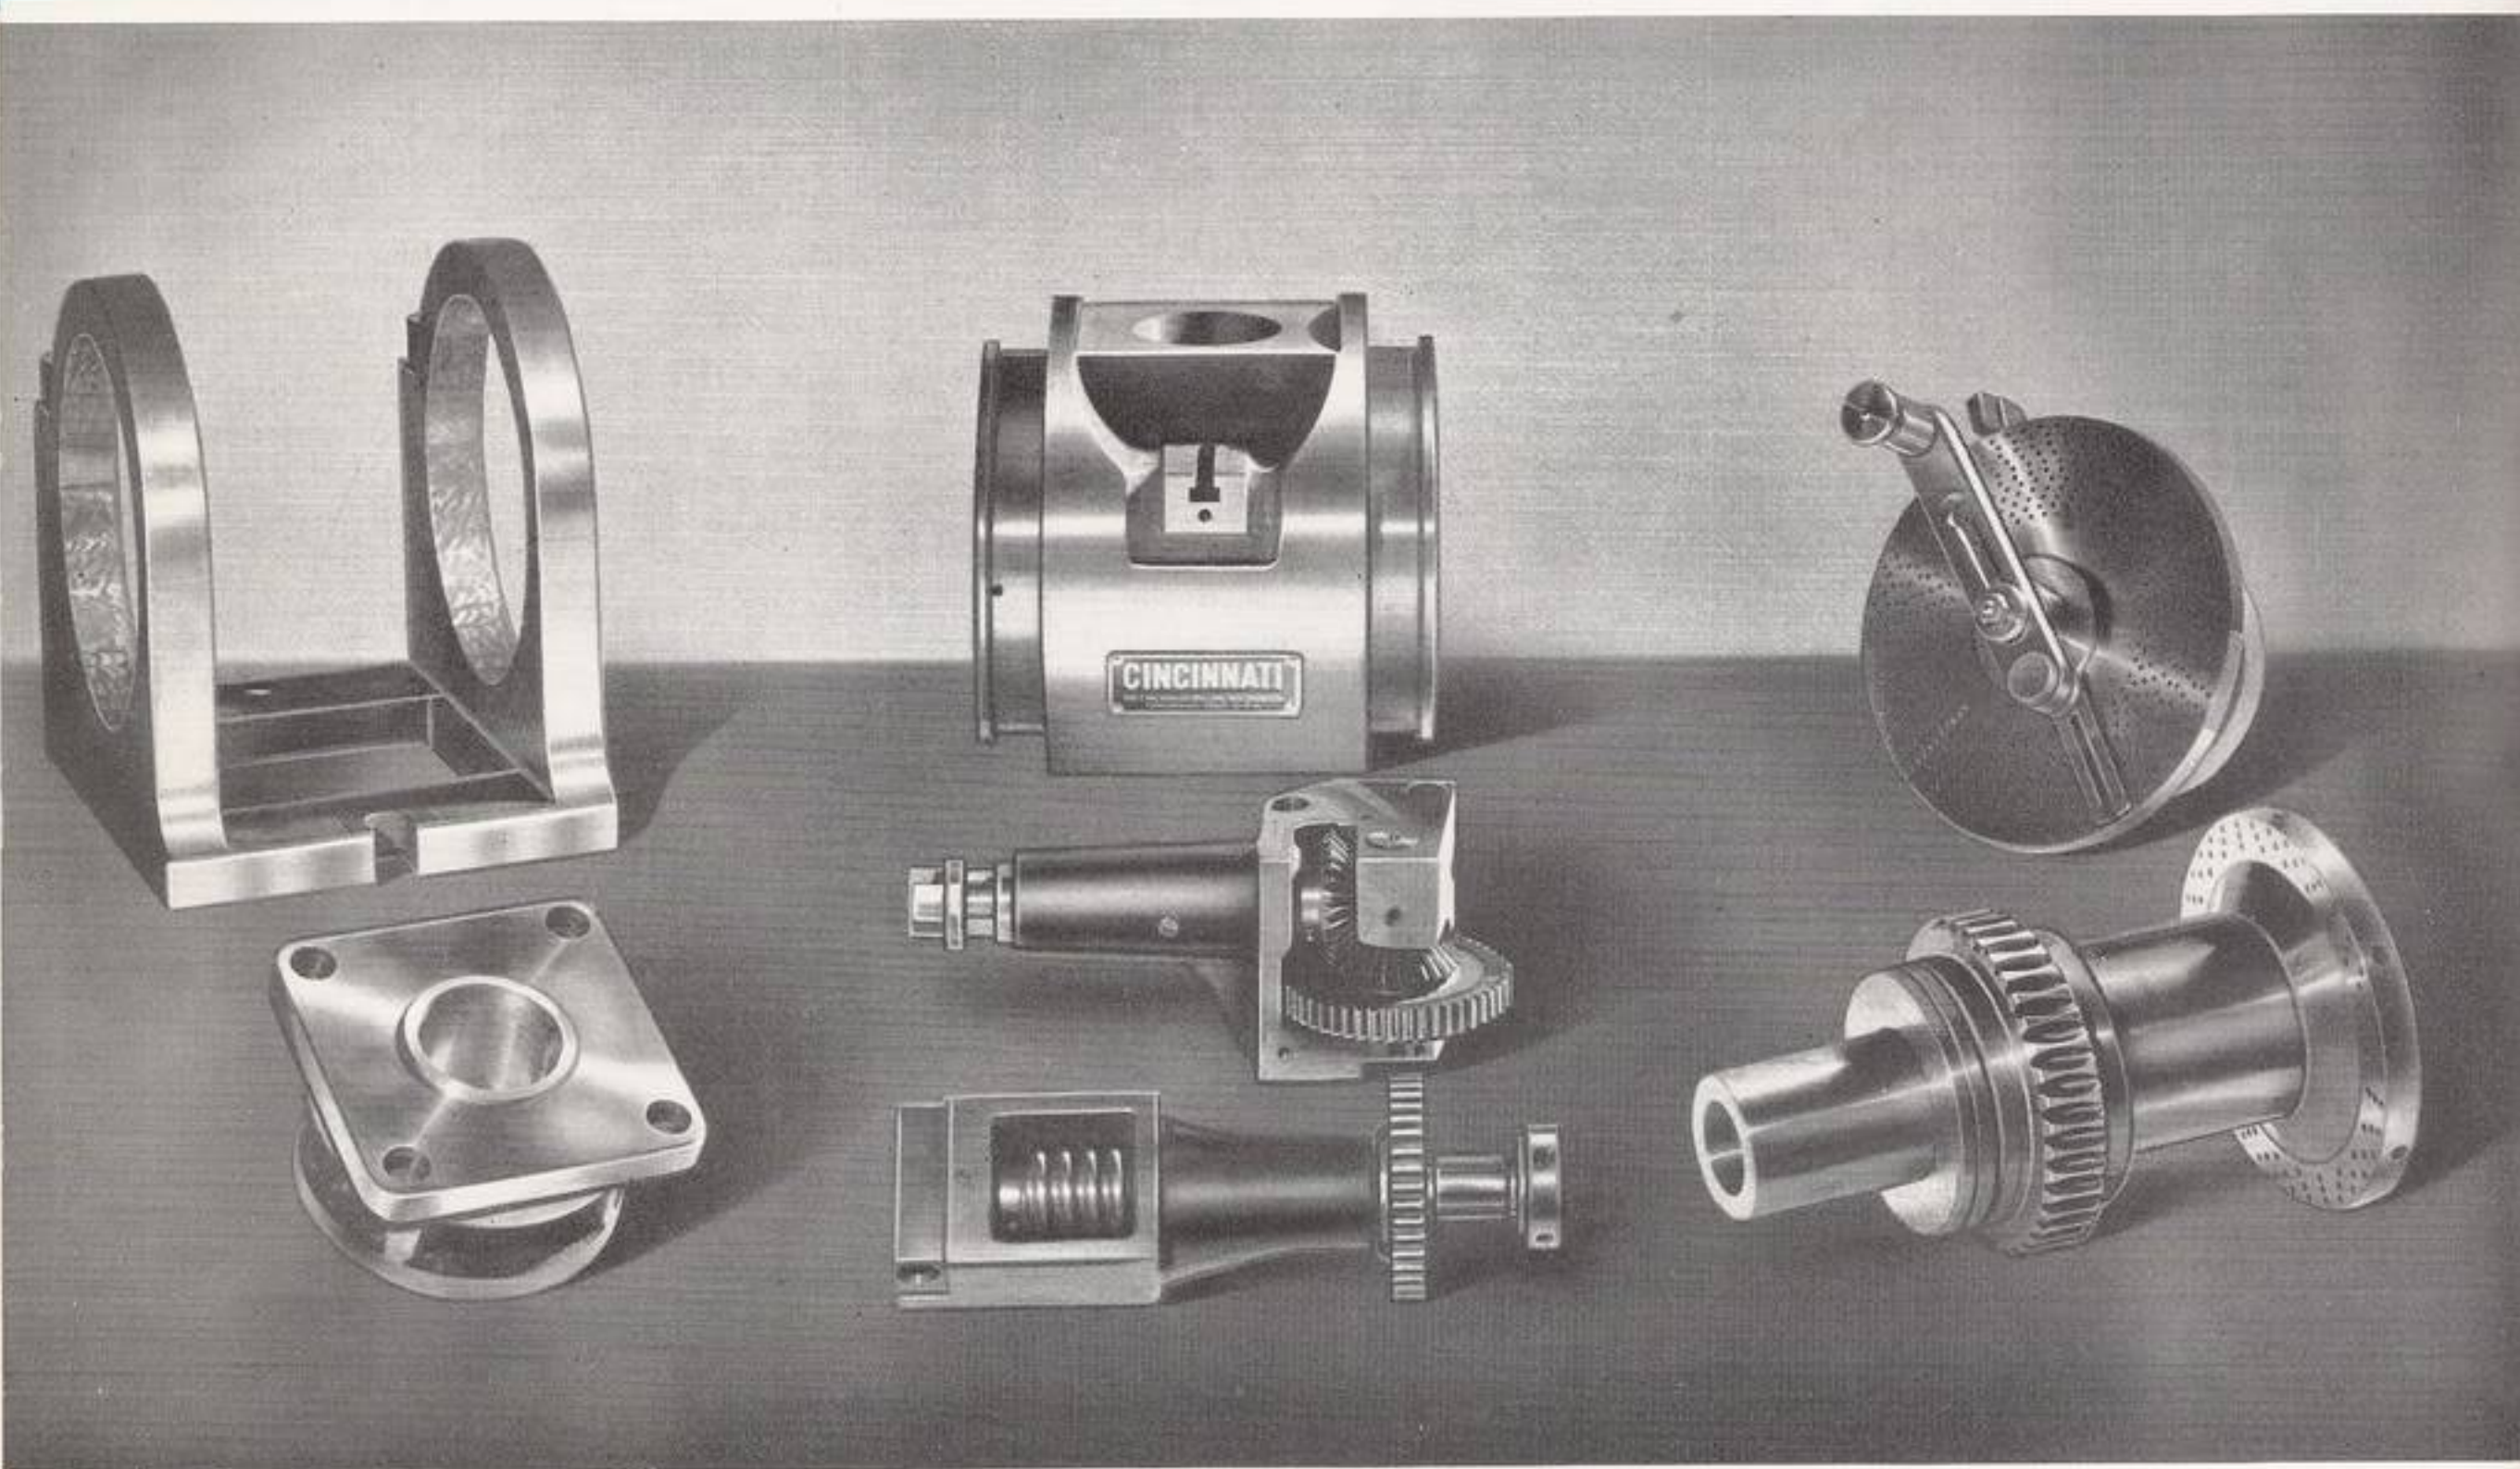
Sub-Assemblies of the Dividing Head and Mitre Gear Bearing
